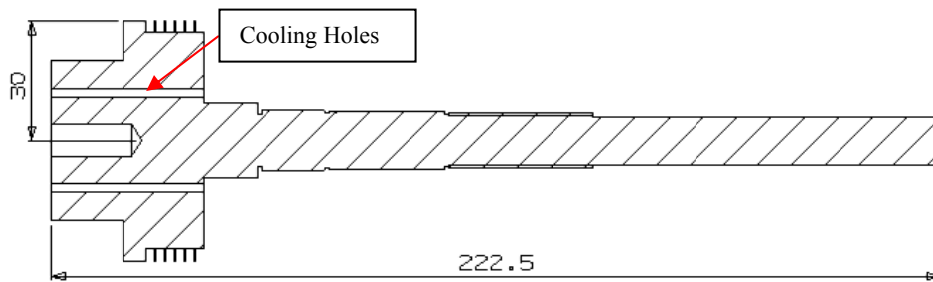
Shaft with Cooling Holes for Bearing Cooling.
